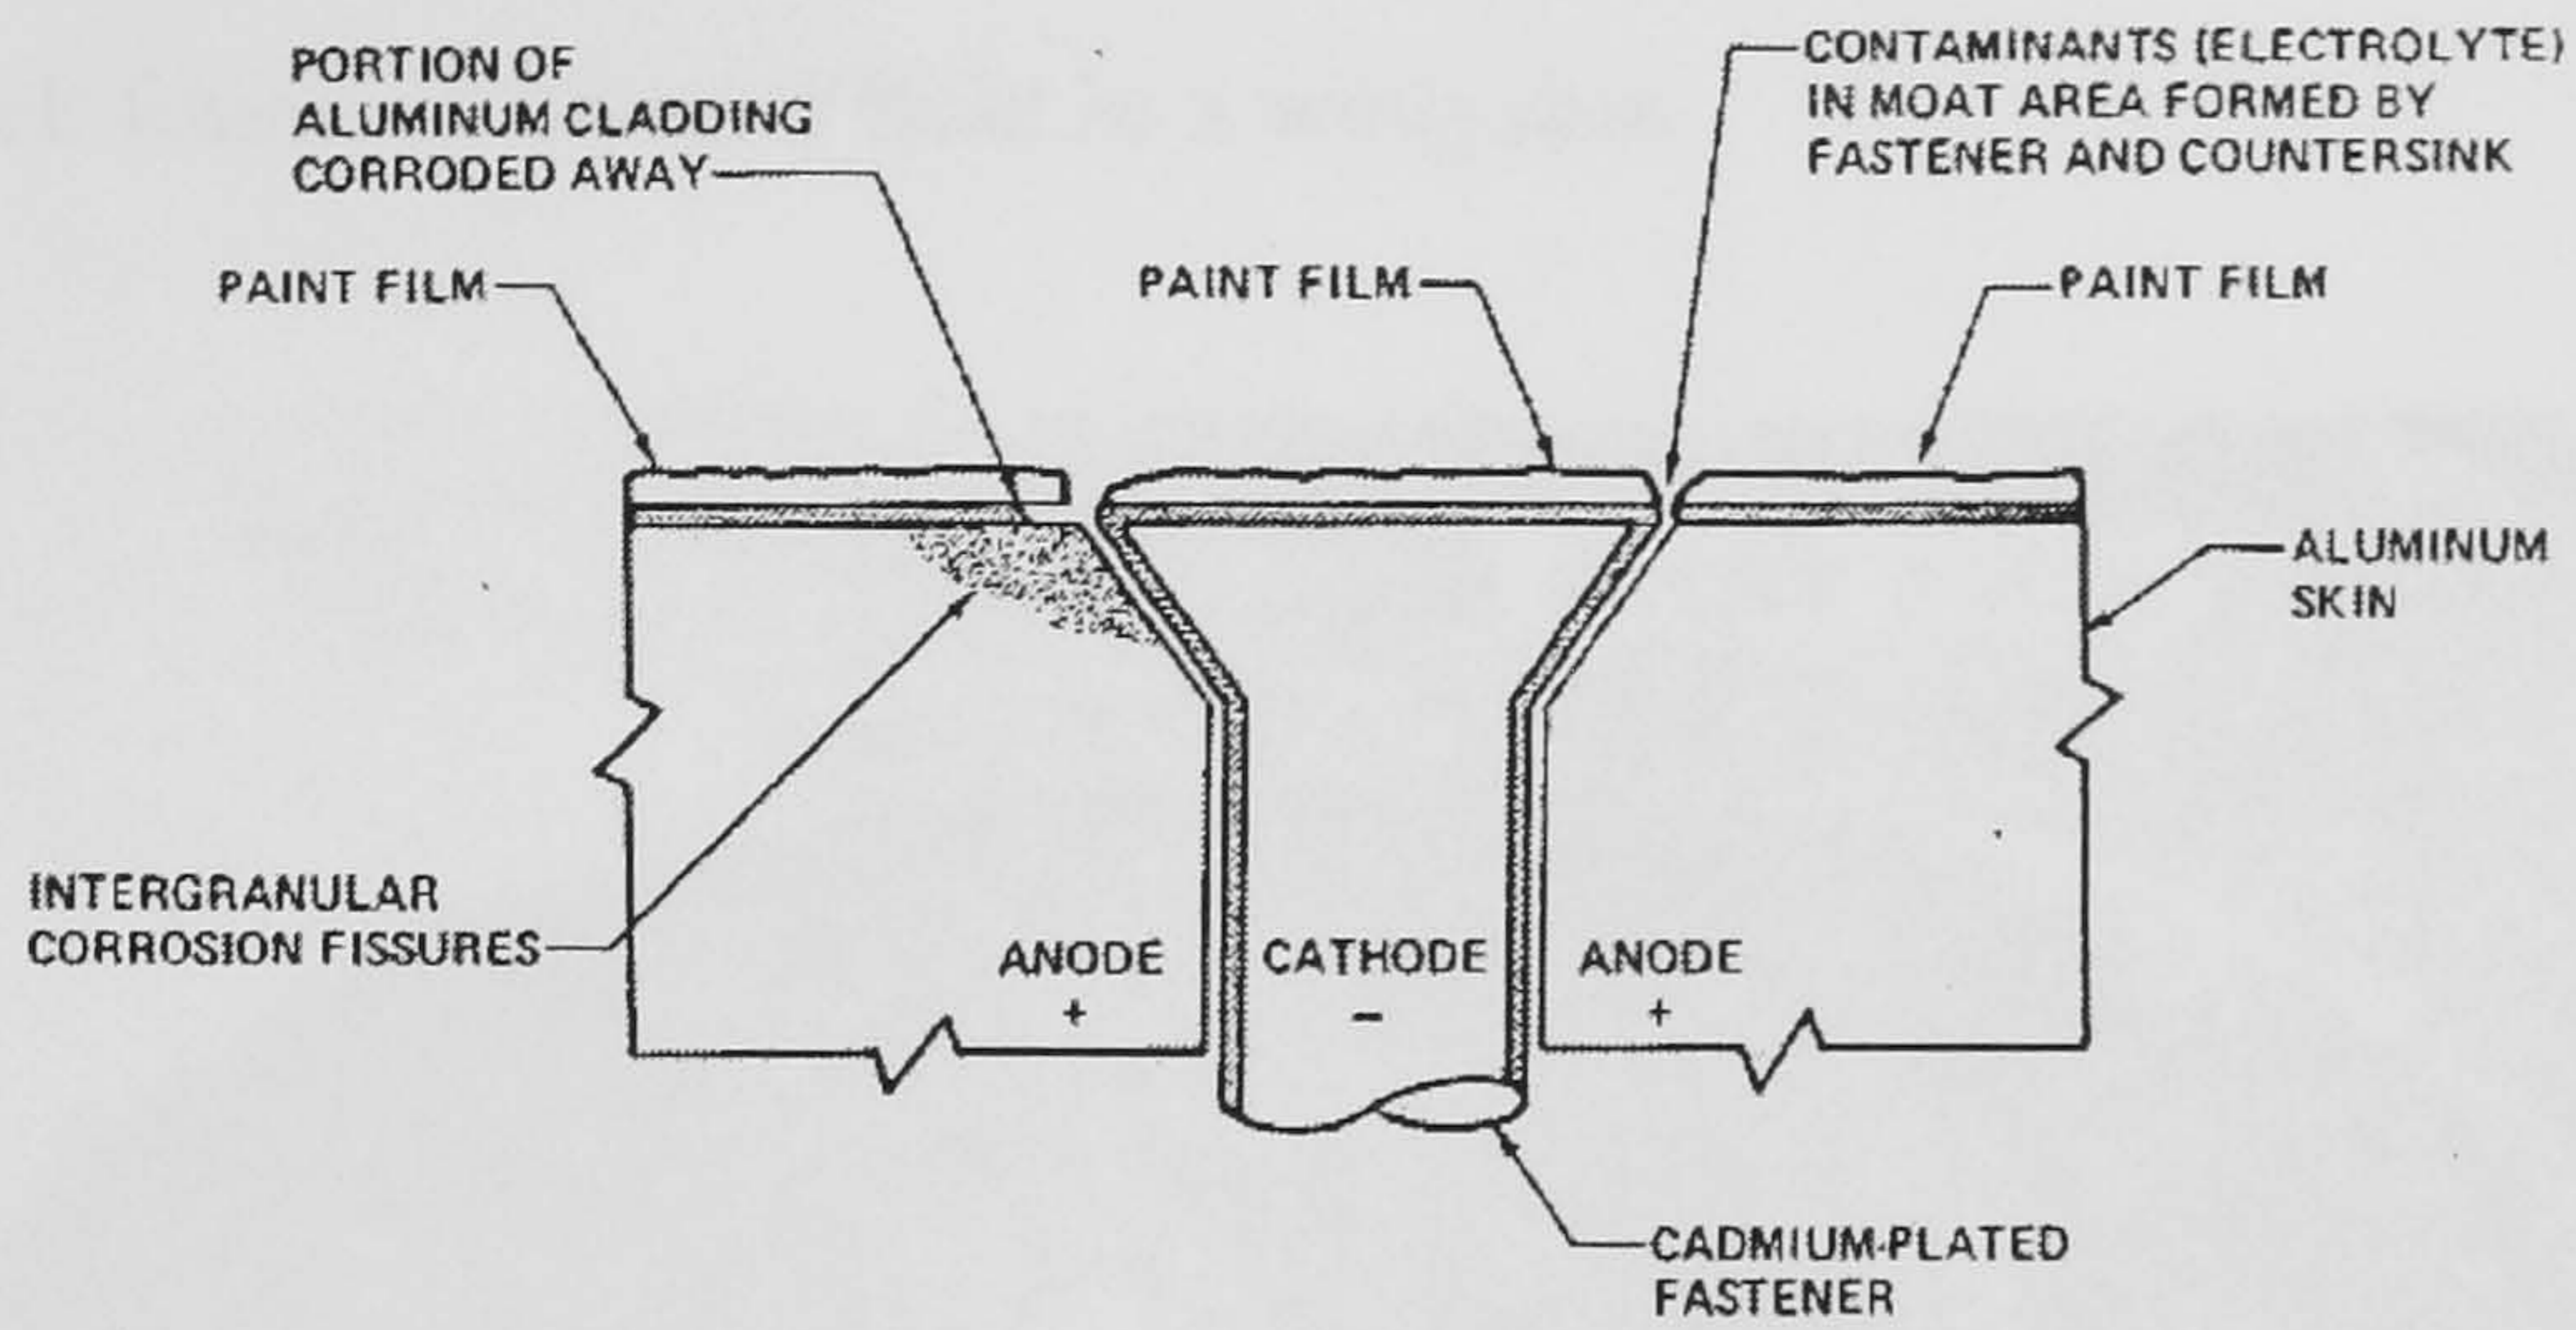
show schematic diagram to the galvanic corrosion occurring in a fastener hole [5].
